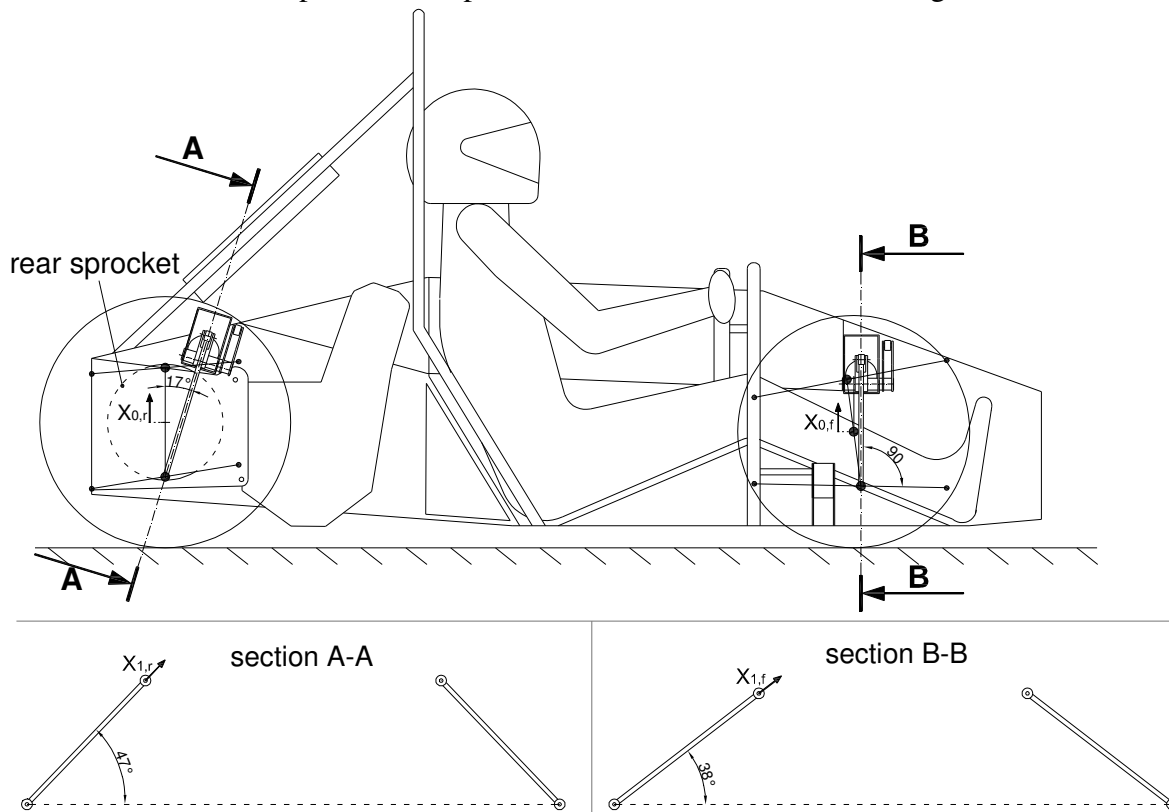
Sideview of suspension box placement and pushrod plane sections
